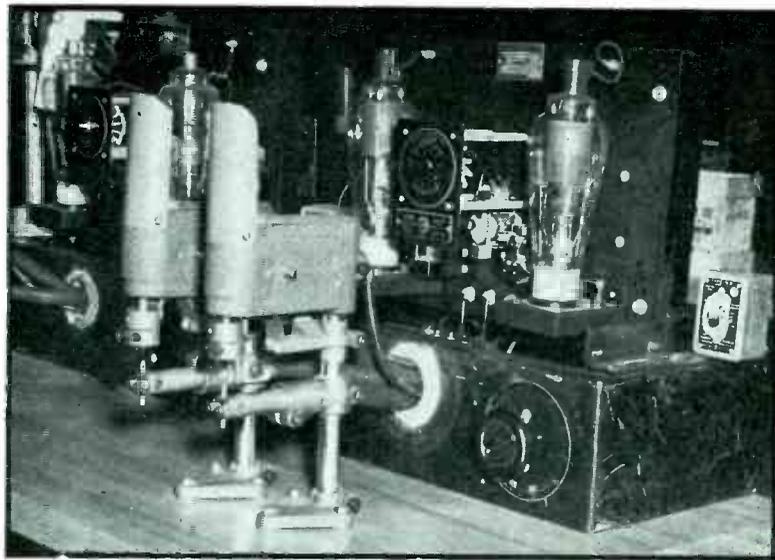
B—Typical spot-welding control, shown with cover removed
